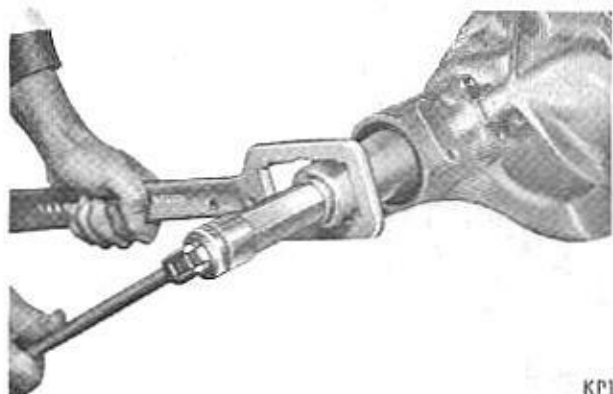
Rear Axle Setting Gauge Tool C-758-D4
